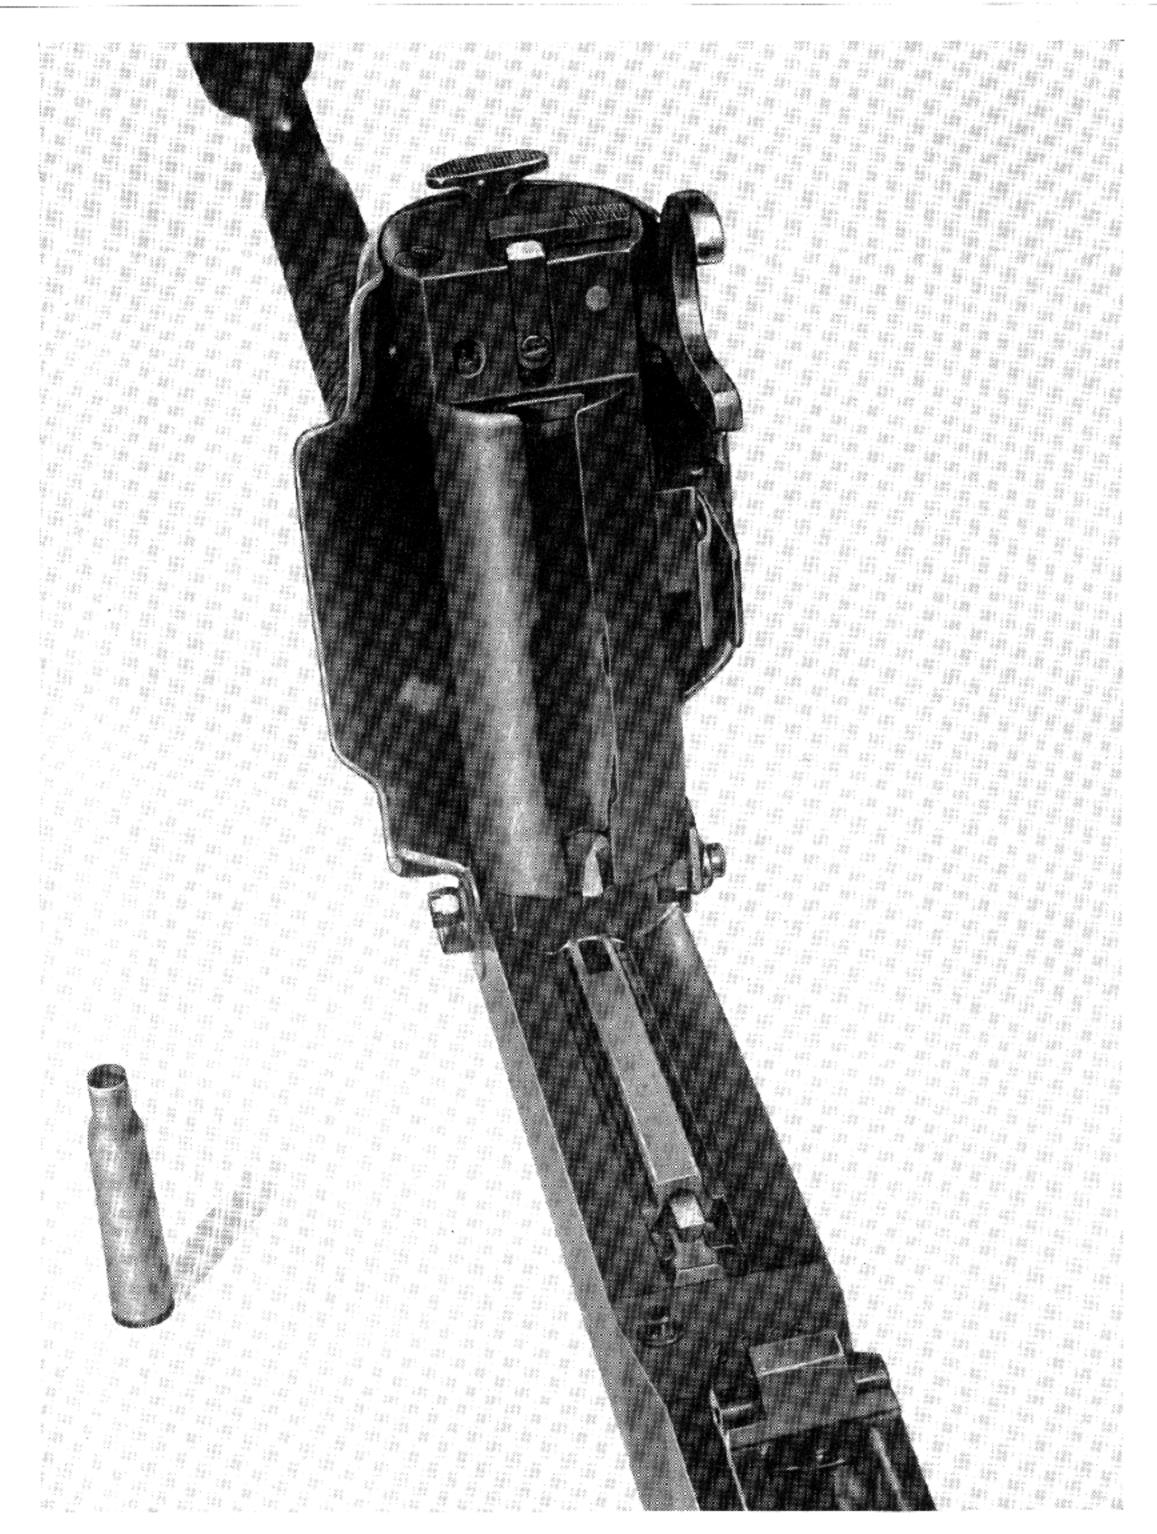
The 12.7-mm DShK Machine Gun with the entire feed hinged up, showing the lips from which the bolt picks up the round on the forward stroke. In this view, the bolt is in battery position.
